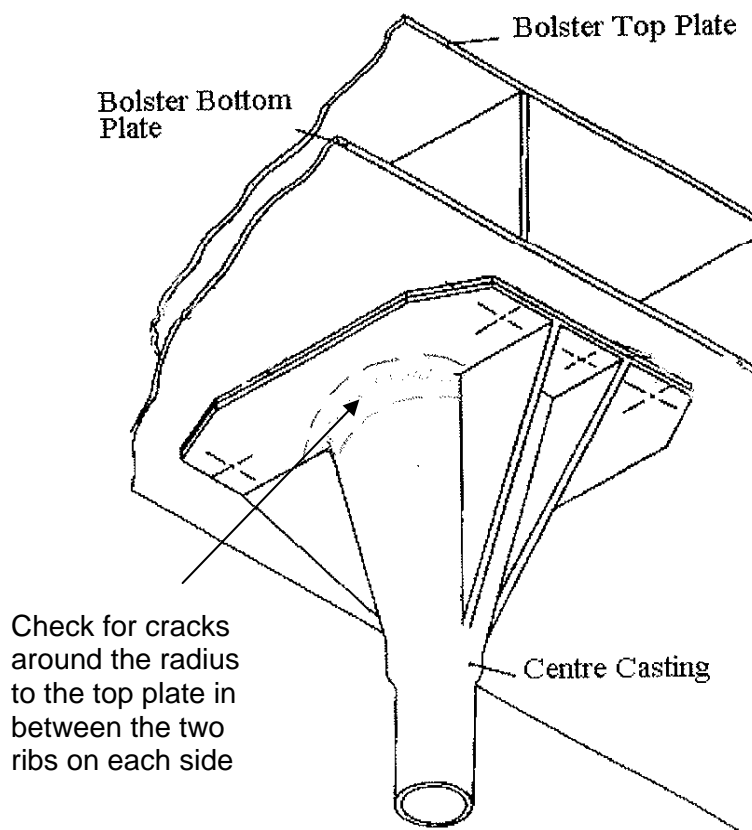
Location for MPI Inspection on Centre Pivot Casting
